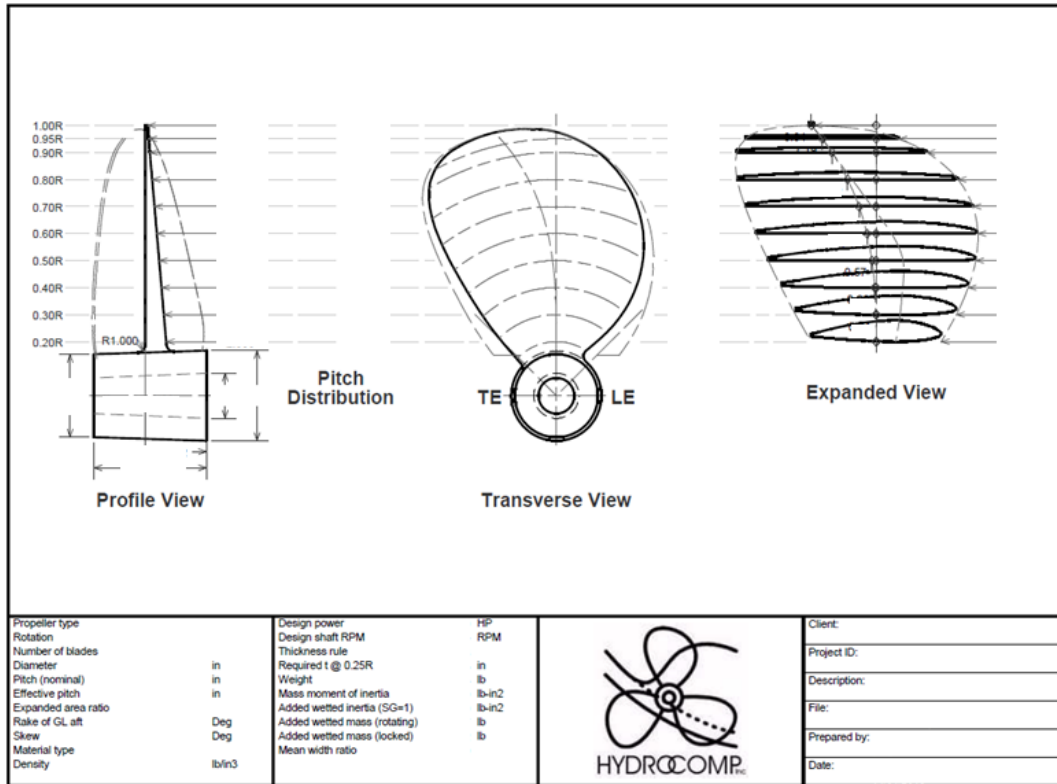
Two-dimensional propeller drawing (dimensions removed).
